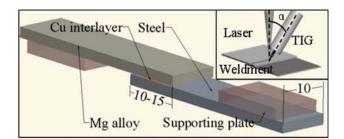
Sketch of the specimen for tensile shear test (mm)
